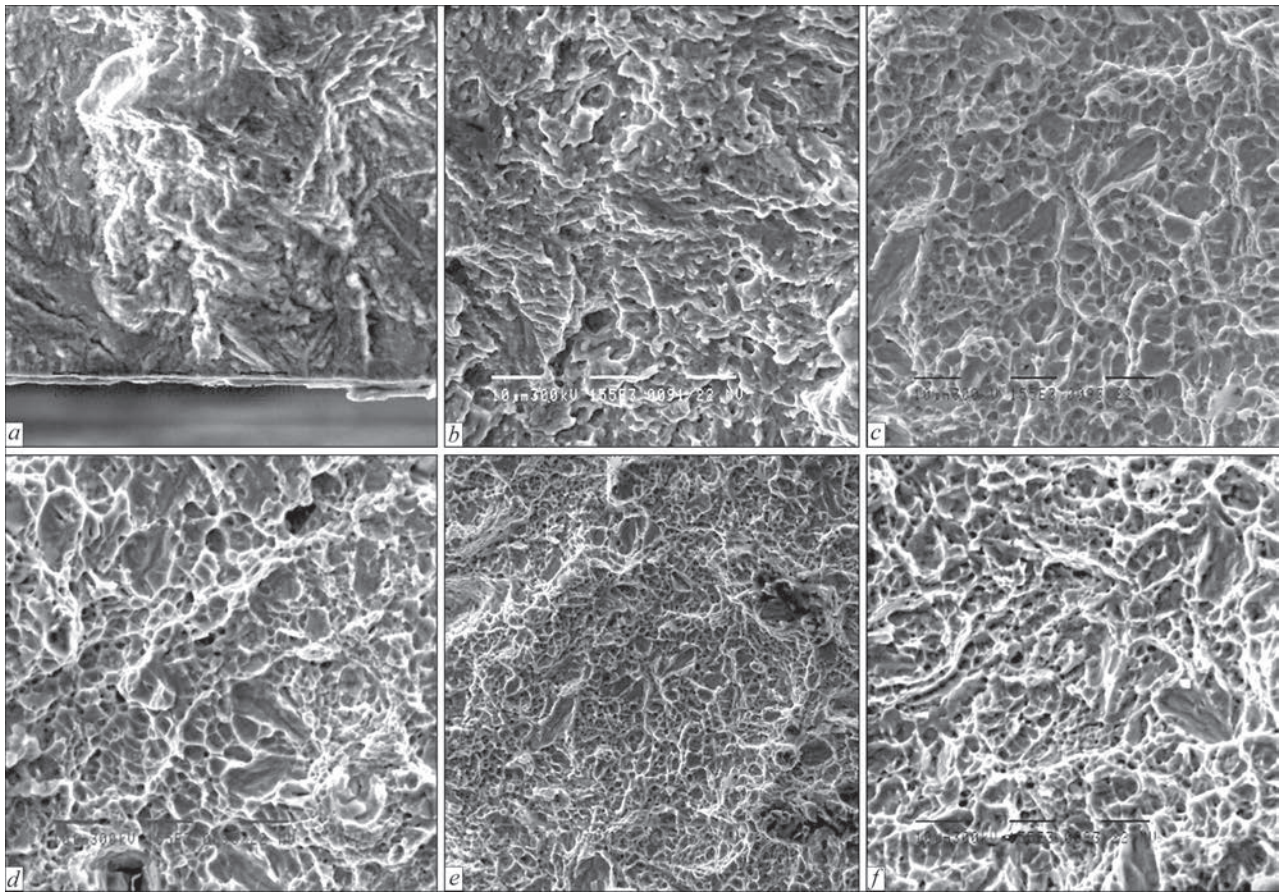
Fracture mode by zones of armoured steel fracture ($w_{6/5} = 21$ °C/s): *a, b* — in fatigue crack zone; *c–e* — in the zone of main crack development; *f* — in final fracture zone (*a–d, f* — $\times 1550$; *e* — $\times 810$)
